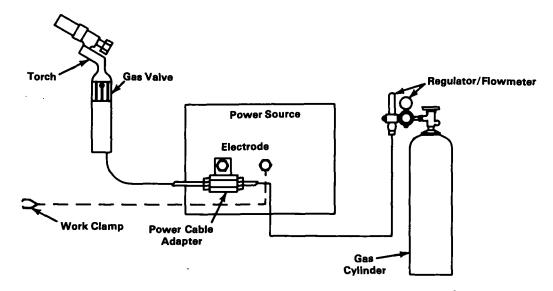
4. Torch Connection Diagram For Models With Gas Valve
